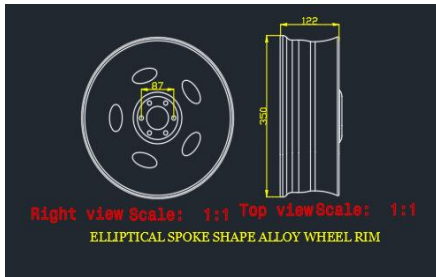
DIMENSIONS OF THE elliptical ALLOY WHEEL
